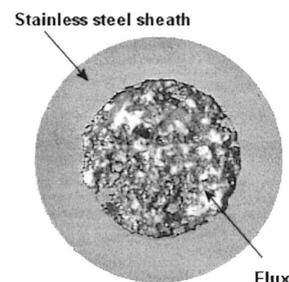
A cross-sectional view of a TGX flux-core filler rod
